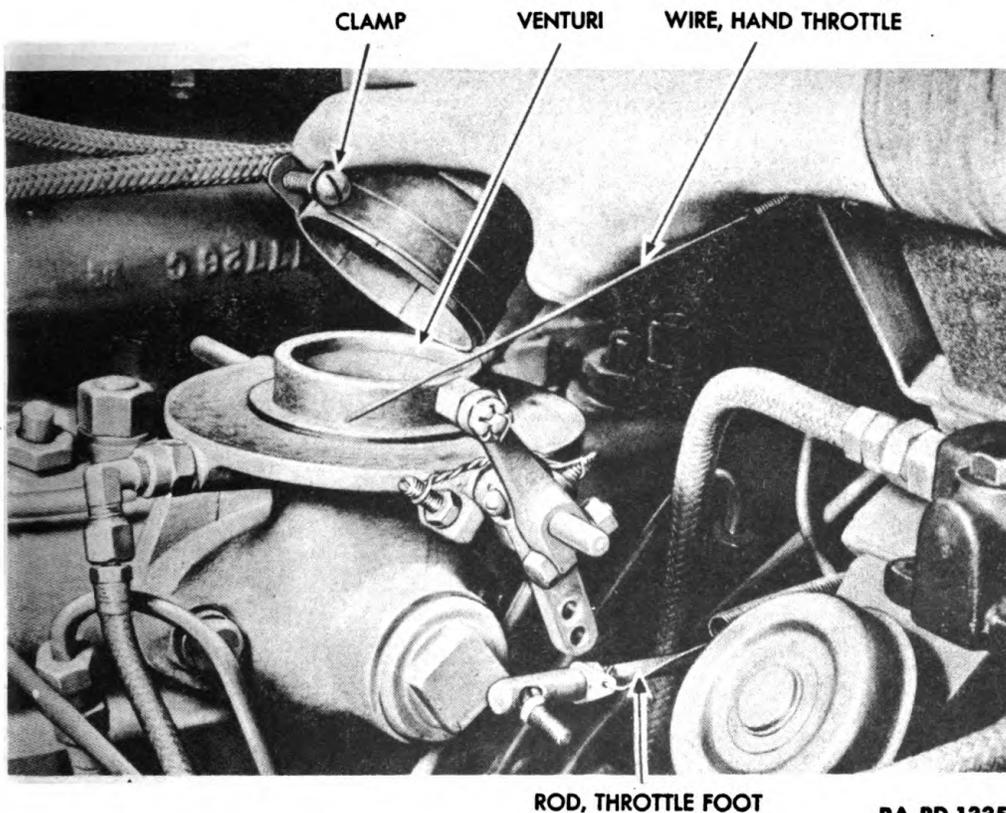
Removing Air Intake and Hand and Foot Accelerator from Venturi
